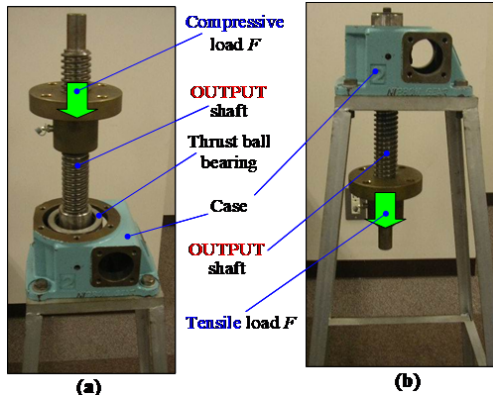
(a) Compressive load, and (b) tensile load acting on the output shaft of the screw-worm gear mechanism, which, as shown in the above photographs, it is placed inside a case
